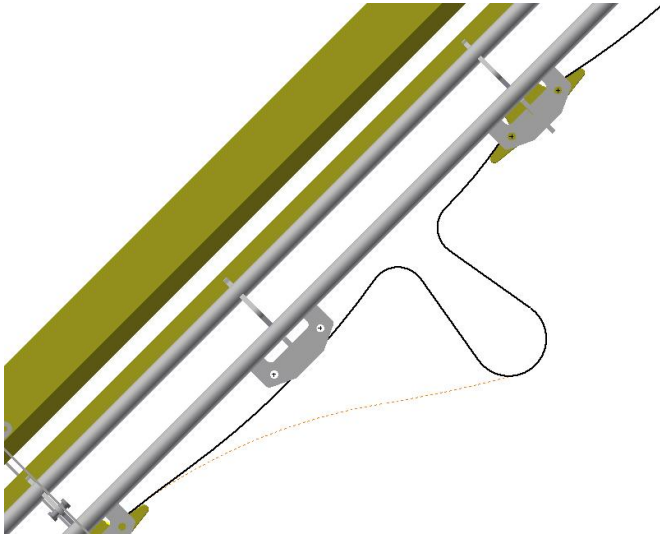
Draft of possible pathway of belt using take-up- or center-drive modules
